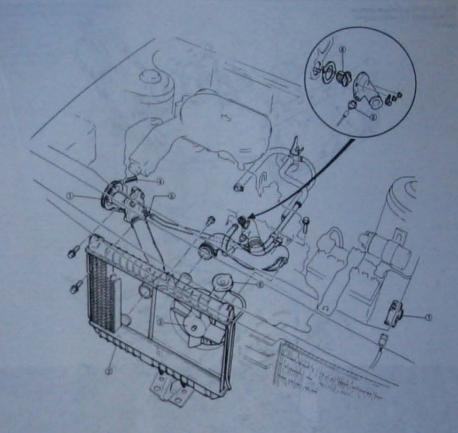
Cooling system component layout Eseries engine (Sec 1)
